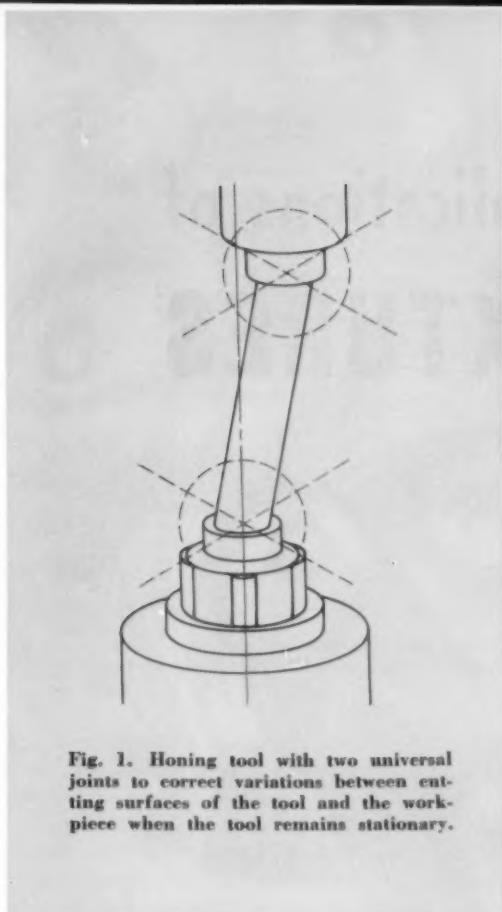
Honing tool with two universal joints to correct variations between entering surfaces of the tool and the workpiece when the tool remains stationary.
